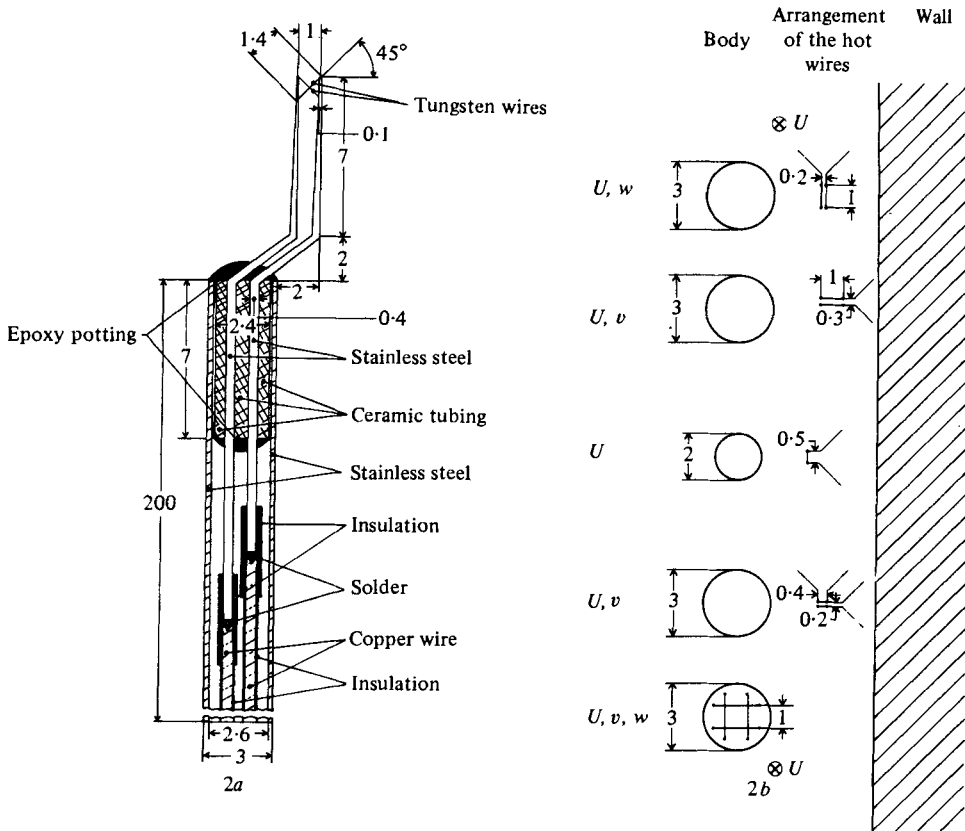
Hot-wire probe construction details. Dimensions in mm.
